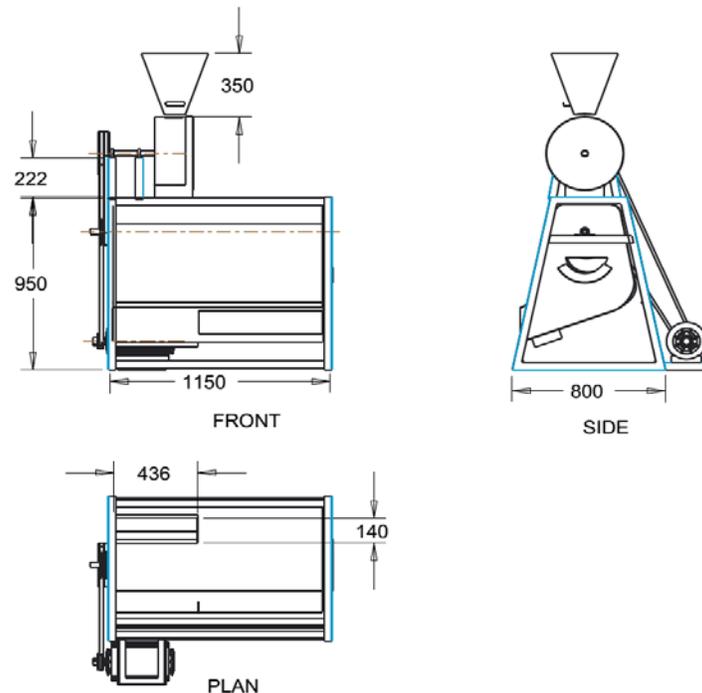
Orthographic views of the cracking unit and pre-cleaner cum classifier of modified machine
